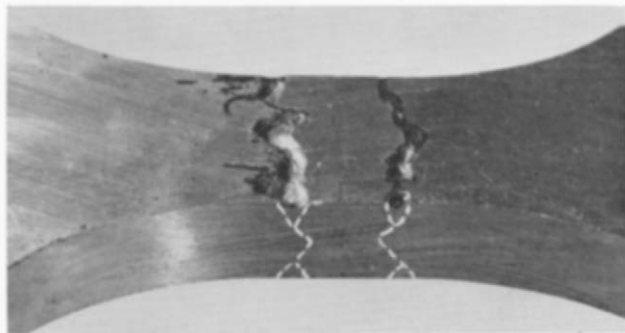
Surface Slag Inclusions in Cast Torsion and Bending Fatigue Specimens.
